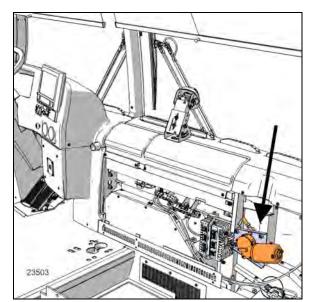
WIPER ELECTRICAL MOTOR LOCATION
